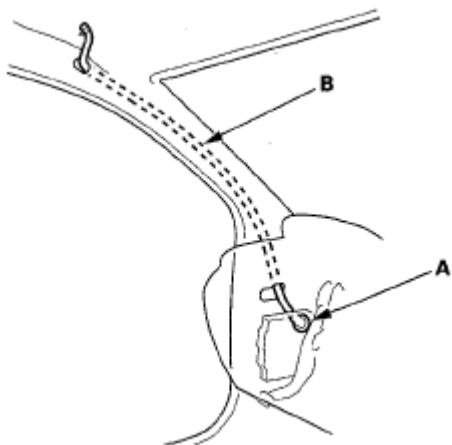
Identifying Front Drain Valve And Front Drain Tube
